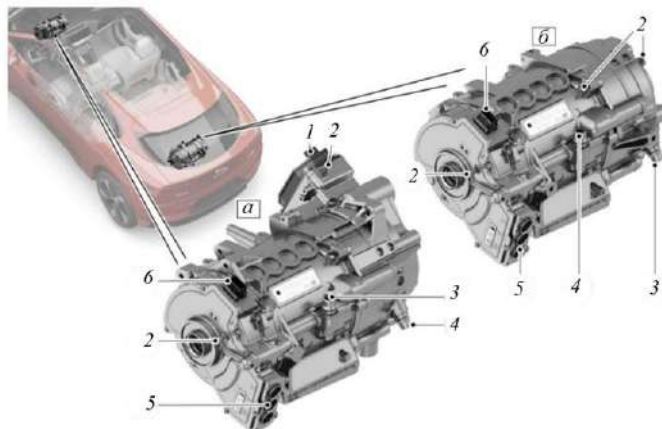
Location of electric motors in *JAGUAR I-PACE*: A- front electric drive unit; IN- rear electric drive unit; 1- parking drive wiring harness connector; 2- breather connection locking; 3, 4- coolant connection; 5- three-phase connector cable to the corresponding inverter; 6- wiring harness connector 12 V
